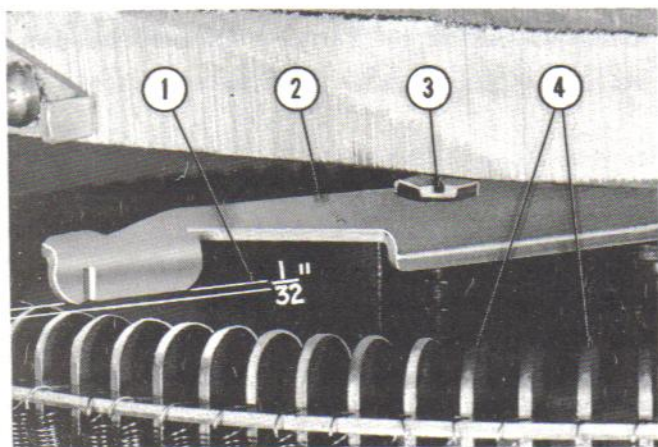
SELECTOR CRANK ARM CLEARANCE - 2504
